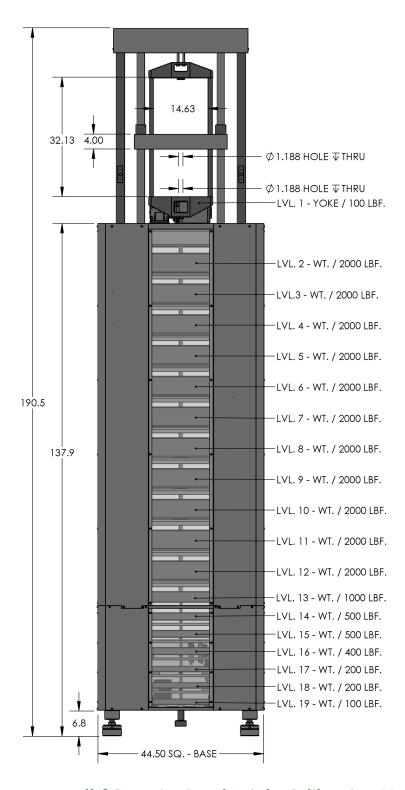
25,000 lbf Capacity Deadweight Calibrating Machine Drawing DWM-25AD-010-90
